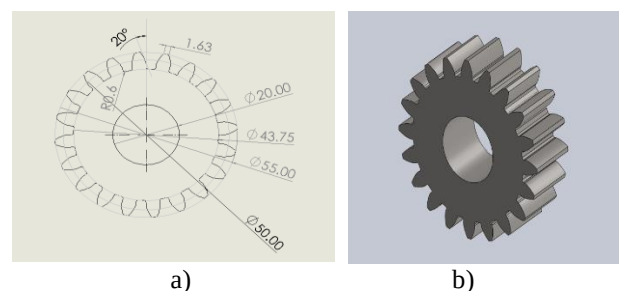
Geometry of the spur gear- a) Technical drawing, and b) 3D model
